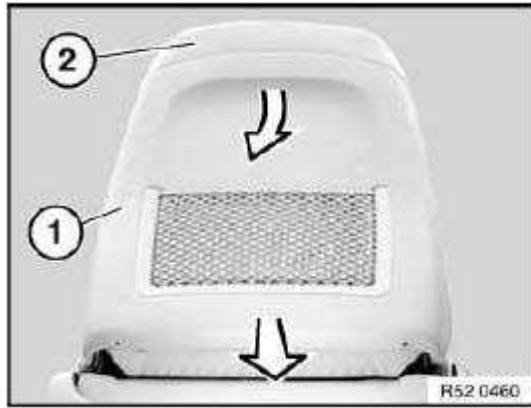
Pulling Out Rear Panel At Bottom Towards Rear
